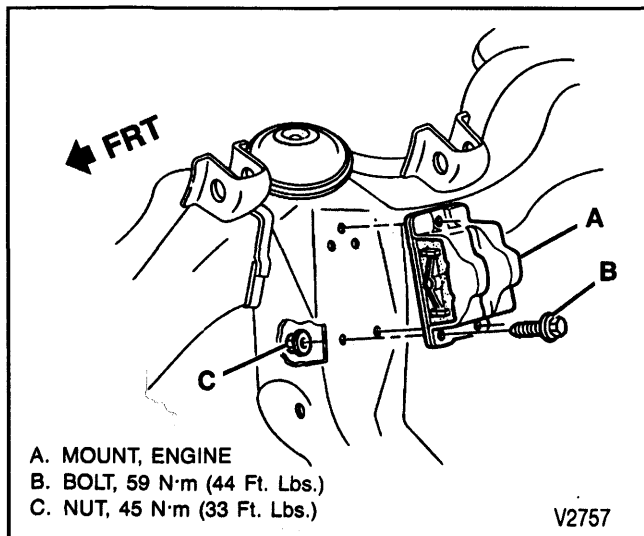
Front Engine Mounting Brackets to Frame (C-Models)
